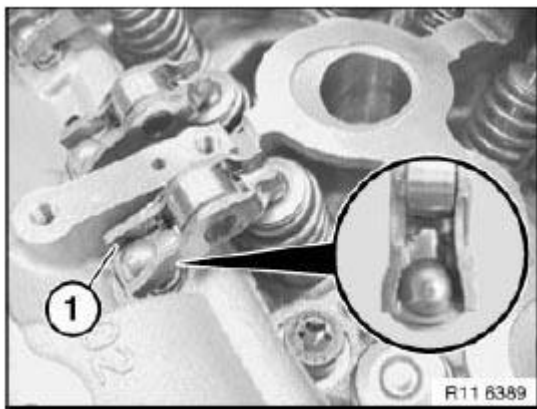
Installing Roller Cam Follower On HVCA Element And Valve
